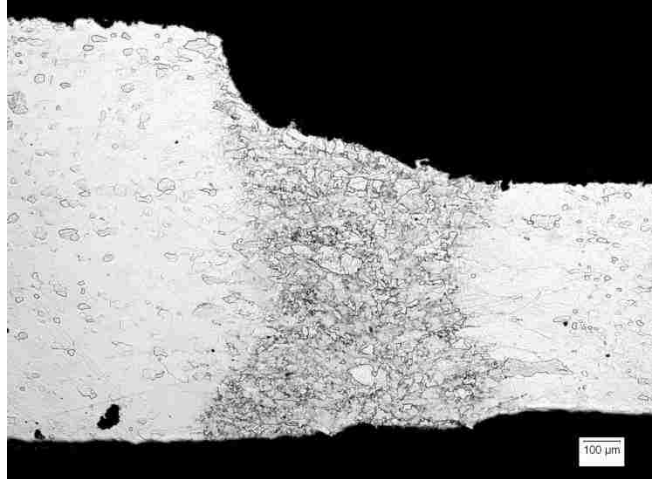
Laser butt weld cross sections made in 1.2 mm JAC270F galvanized steel with 0.64 mm JAC270F galvanized steel [4]
